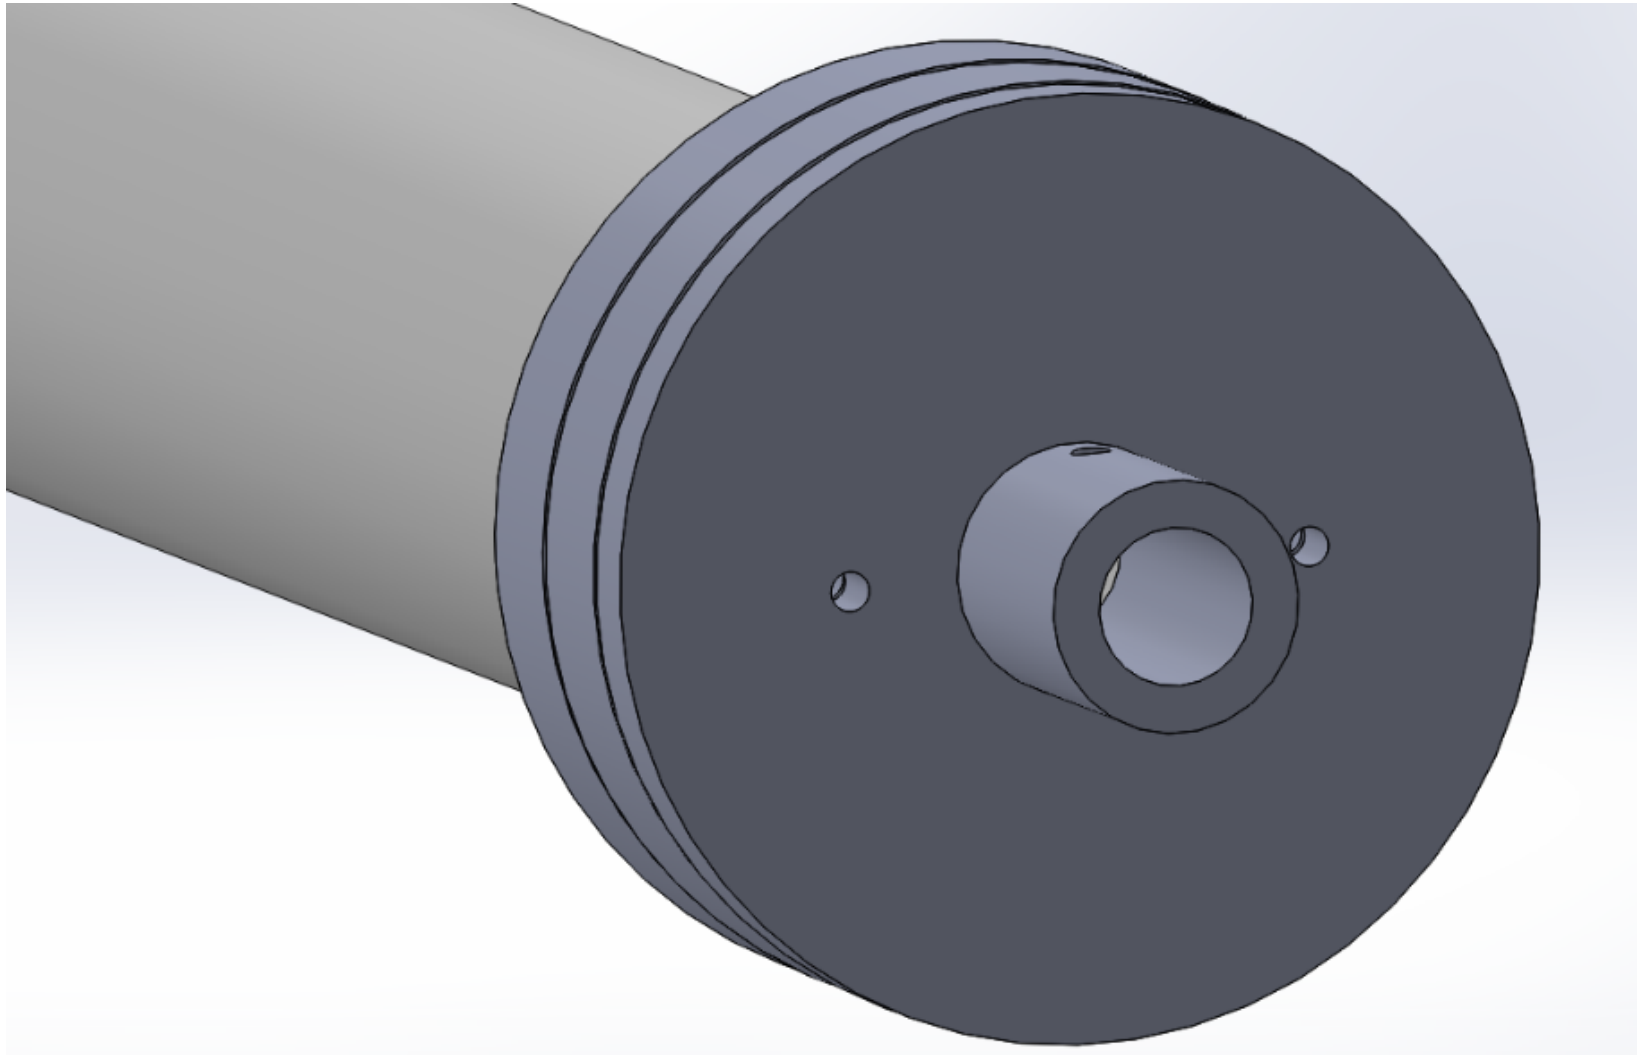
Sectioned view of one flange, inner tube, and the outer tube of the proposed cell. Not shown are the O-rings, window, bolts, epoxy for inner tube, inlet/outlet, or alumina thermocouple sheaths. Image taken from SolidWorks[®].
